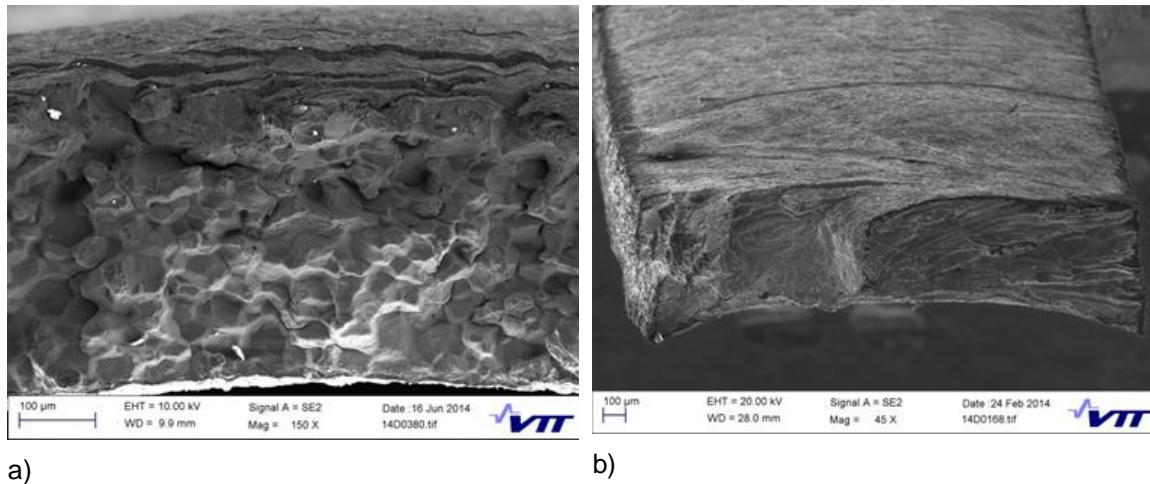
Fracture surfaces of specimens cut from the ~8*0.5 mm 316L tube after the SSRT test in SCW at 550°C. As-received specimen a) has almost fully intergranular failure, and welded specimen (fracture in the middle of the weld) b) has mostly intergranular/interdendritic failure.
